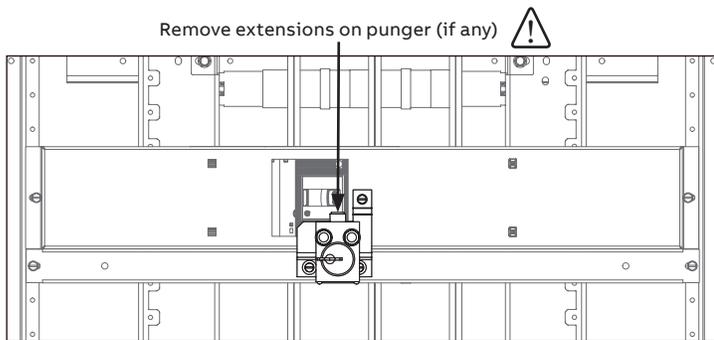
Left side cable entry, XT4 Kirk lock installation on panel
